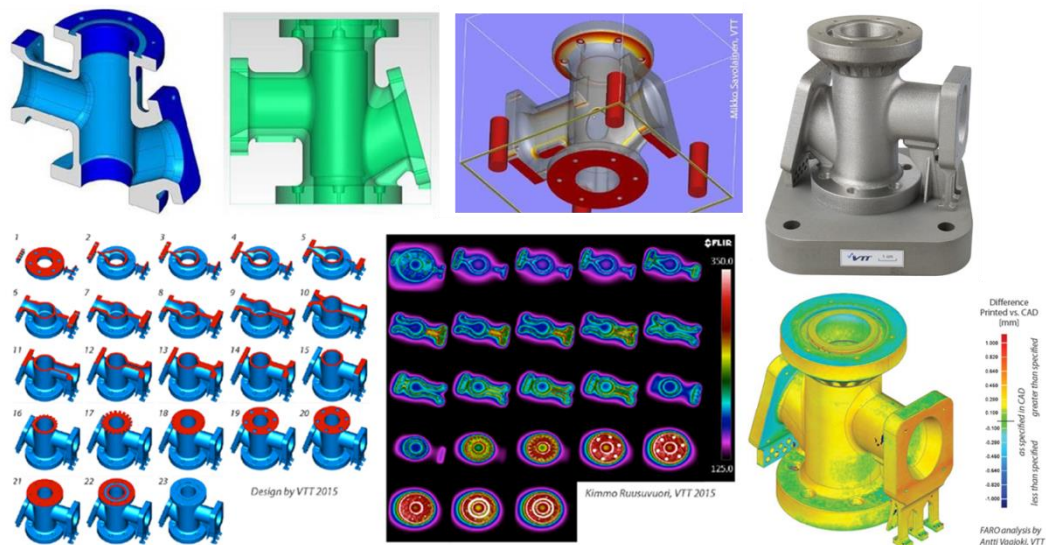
Images of test component CAD geometry, thermal imaging during printing, final printed component, and FARO geometric accuracy measurement.
